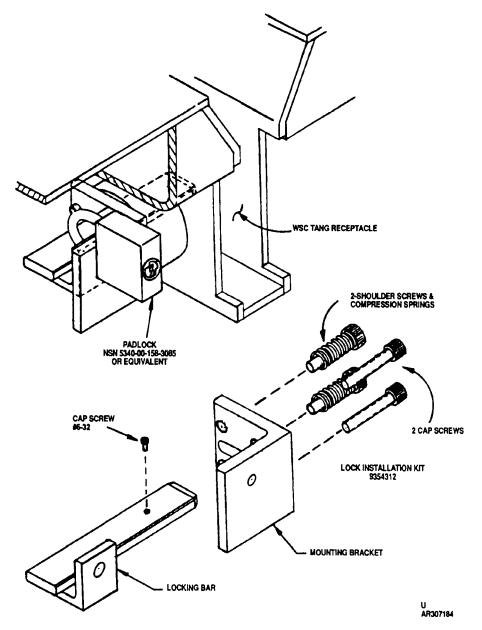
Alternate Lock Configuration for Weapon Security Cage, XH4289.
